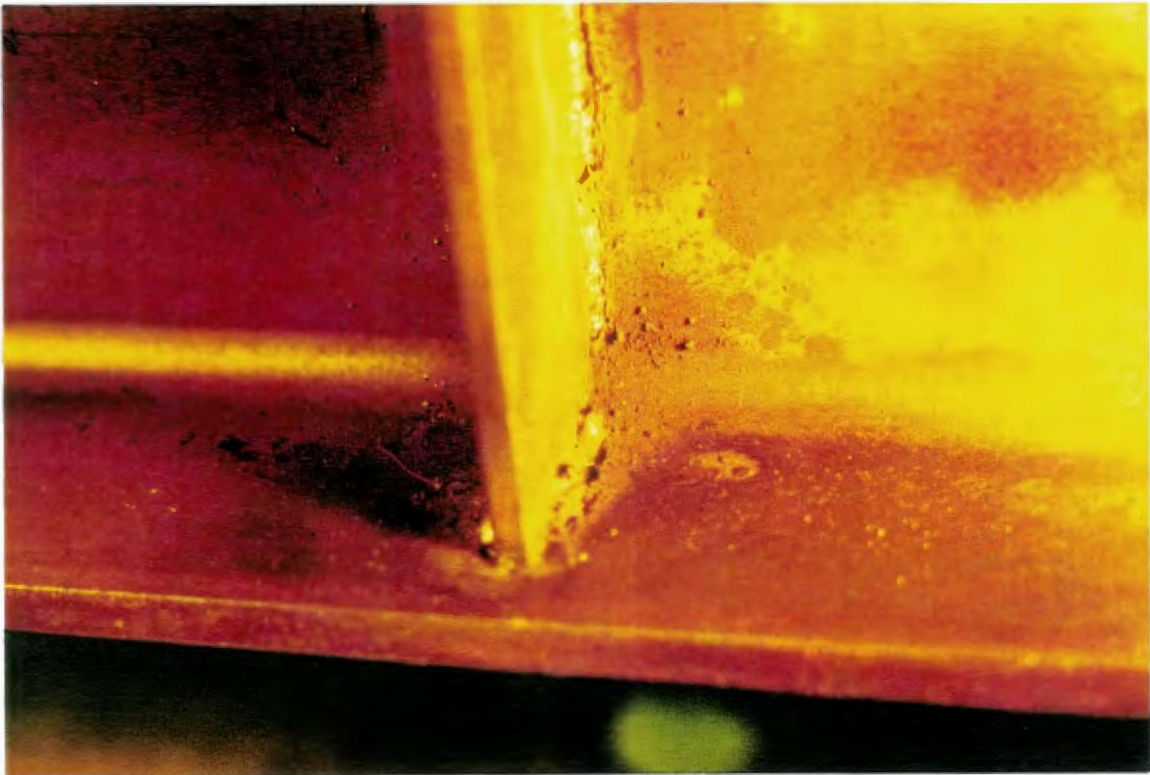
A Typical Welded Joint with Substandard Welds
